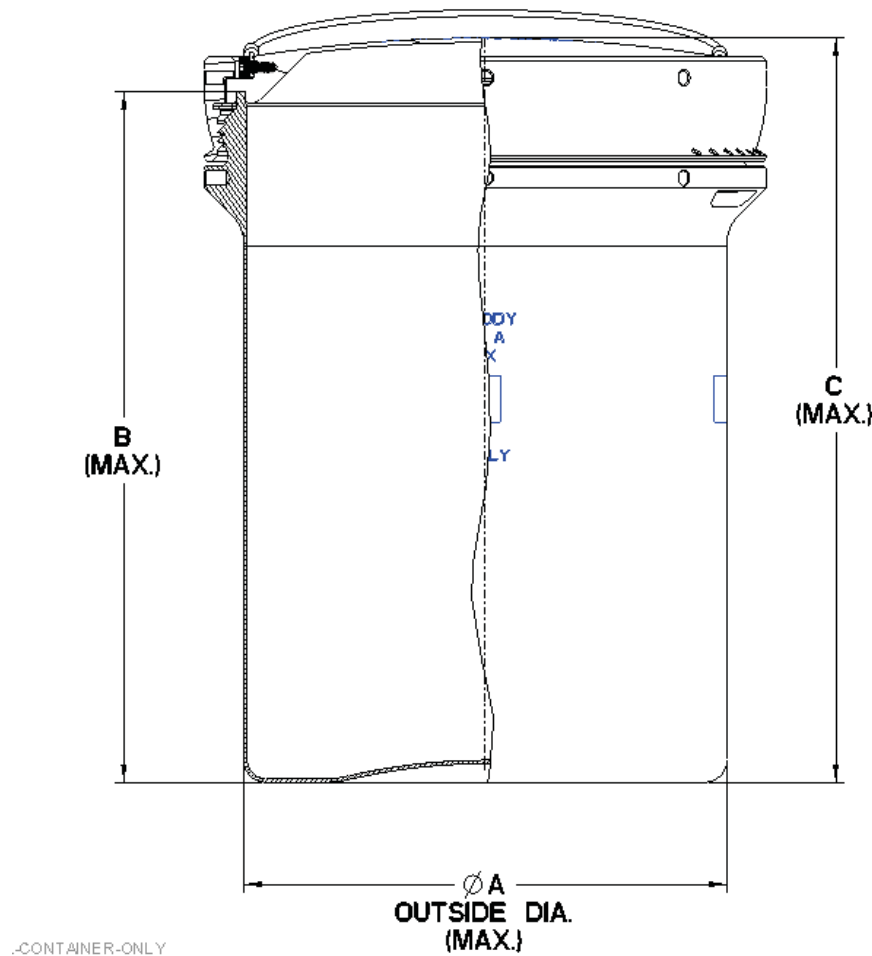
Outer Container Dimensions for Table 6.8-2
